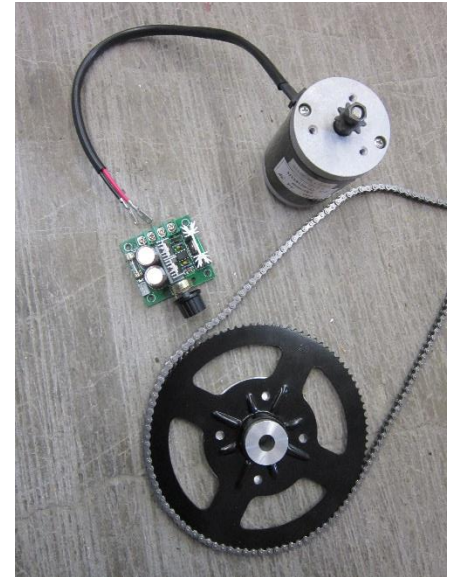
Conveyor Drive Components – Large Sprocket Includes Machined Connection Piece Because of Non-standard Threading
